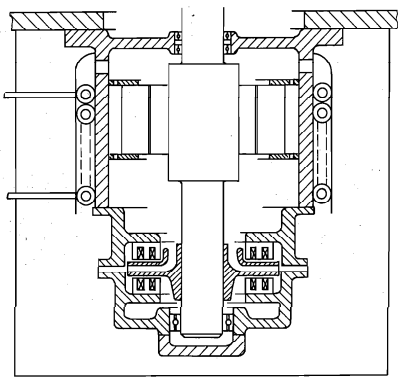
Axial magnetic bearing with integrated impeller for the cooling loop in the motor compartment.
